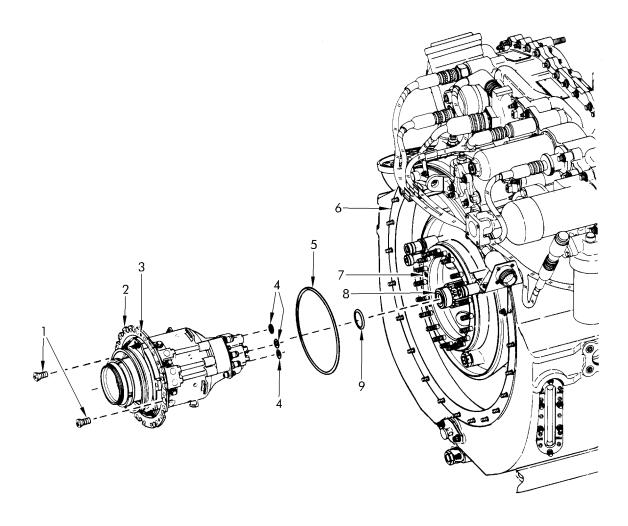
A-Sump Output Shaft Assembly; Removal and Installation
